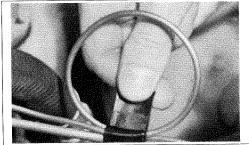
Coil pipeline to take up engine vibration. Connect other end of pipe to gauge.
